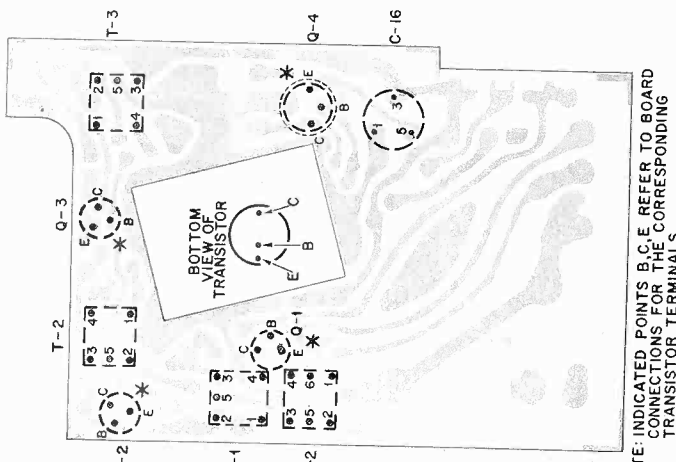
PRINTED CIRCUIT CHASSIS DIAGRAM (BOTTOM VIEW)
